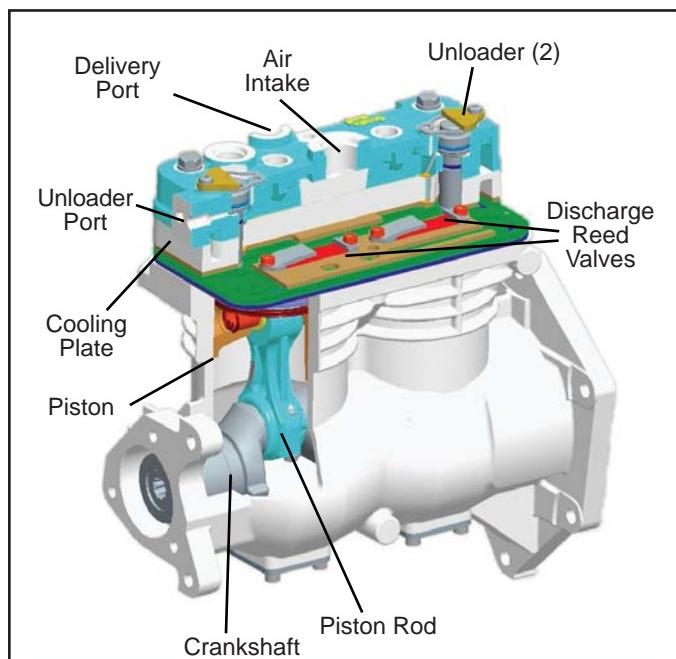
BENDIX® BA-922® COMPRESSOR (CUT-AWAY)
